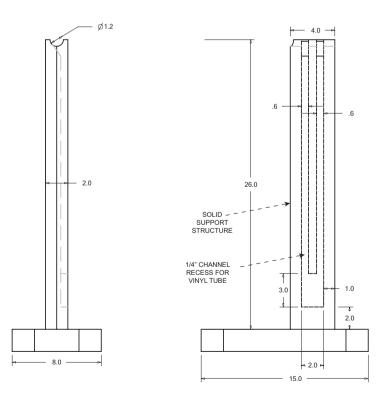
C4 3D printed Pitot tube experimental test fixture.
